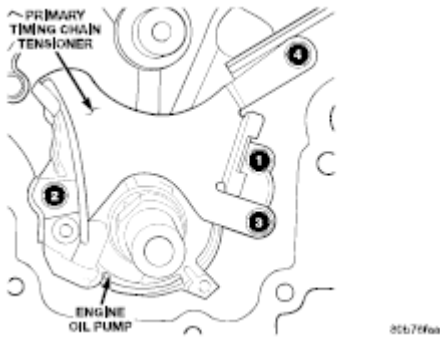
Identifying Oil Pump And Primary Timing Chain Tensioner
